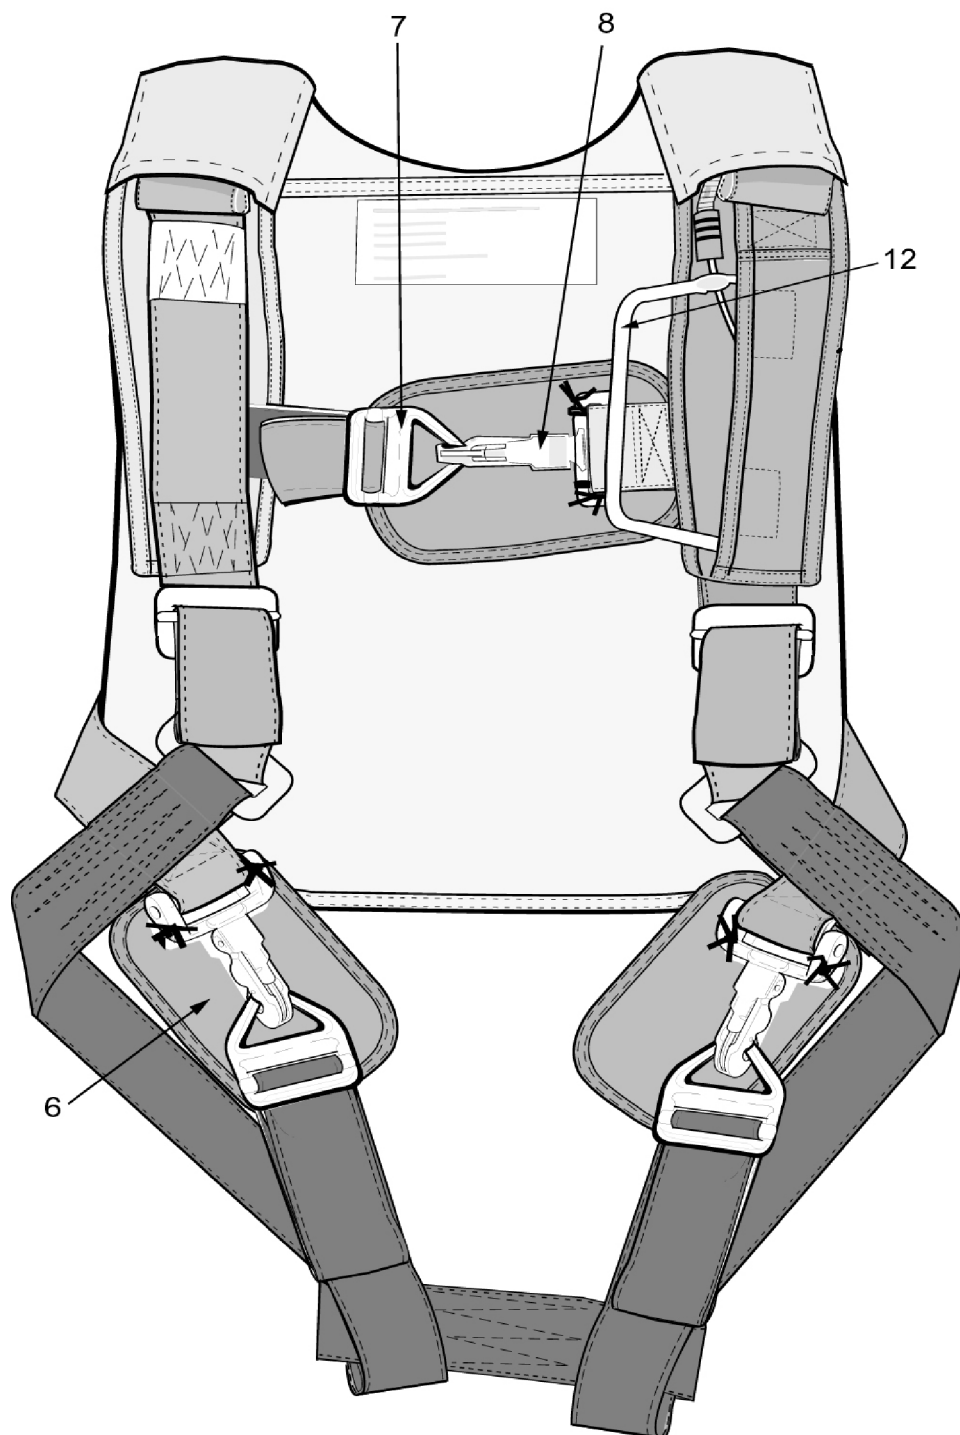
A/P22P-21 Crew Backpack Assembly (Sheet 1 of 4)
